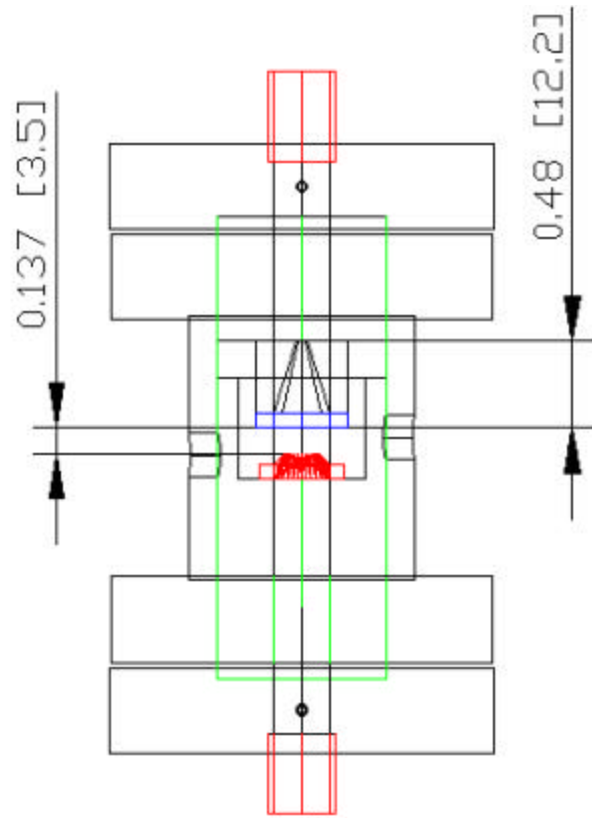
Single-stage optimized EHD pump drawing (dimensions in inches [mm])
